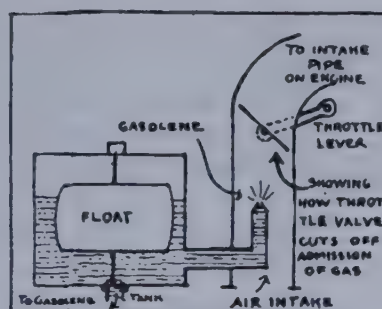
Section View of the carburetor showing how the throttle valve cuts off the gas supply to Engine when closed, or when open admits gas to Engine.
